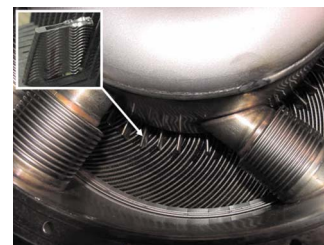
Steady-state elevated TET engine testing of Haynes HR-120 alloy; tack-welded sample shown in the inset
